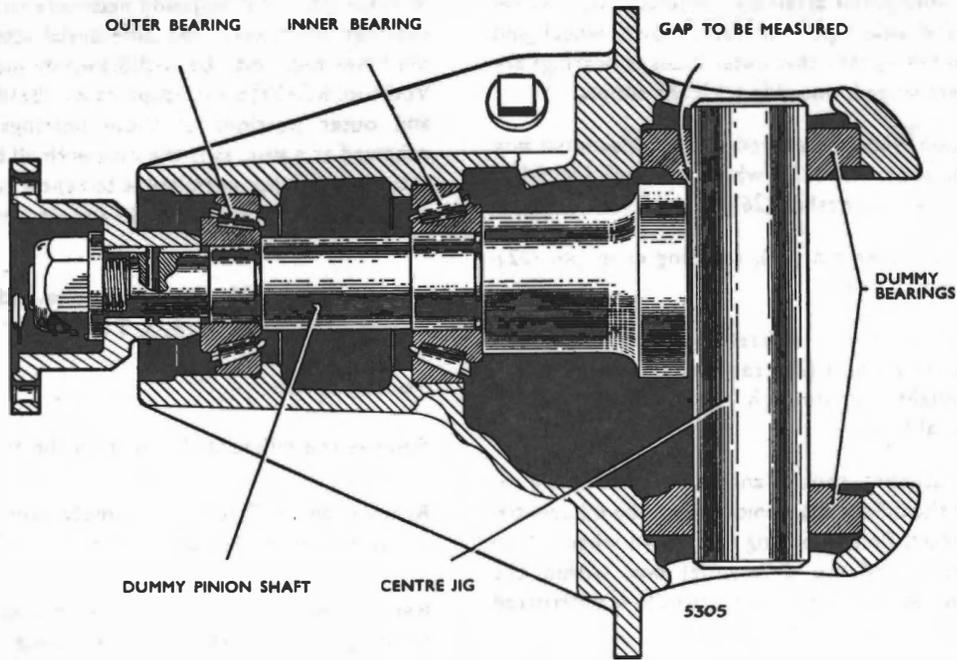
Jigs used in the adjustment of bevel pinion preload and bevel pinion position relative to crown wheel axis
